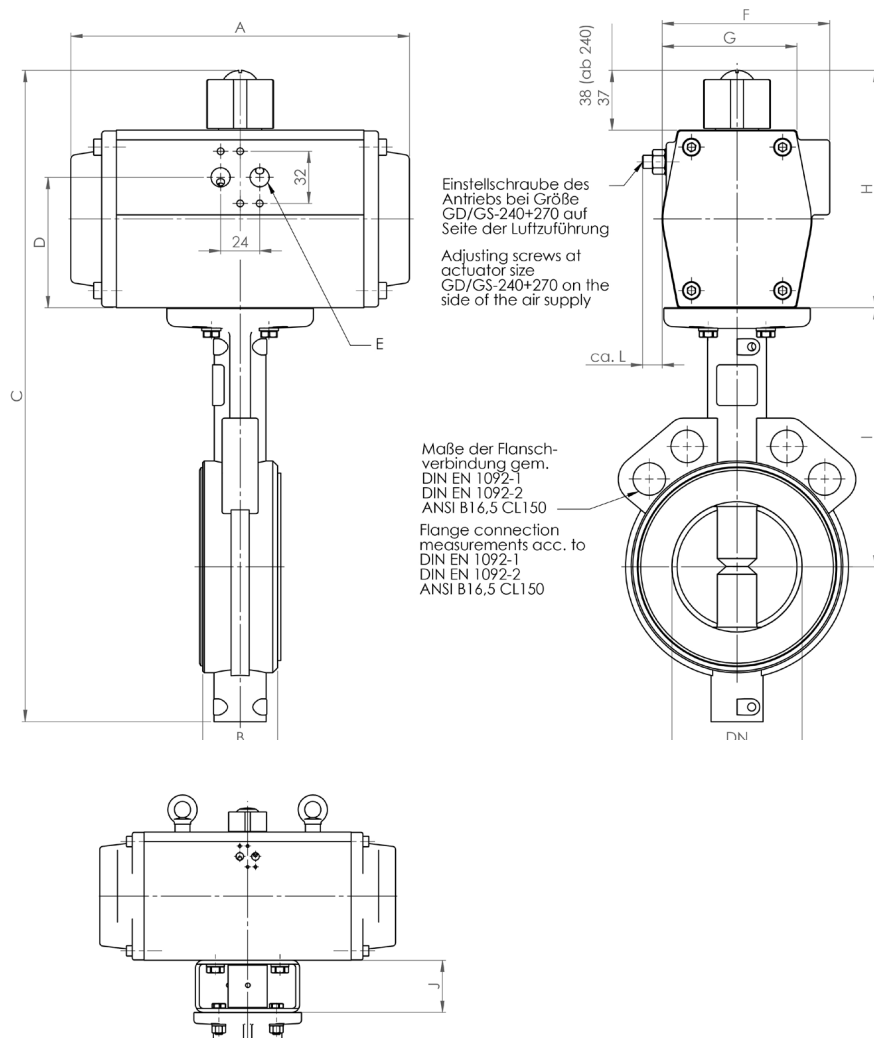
Dimensional drawing Type PZR with bar-agturn type GD/GS-040-270
